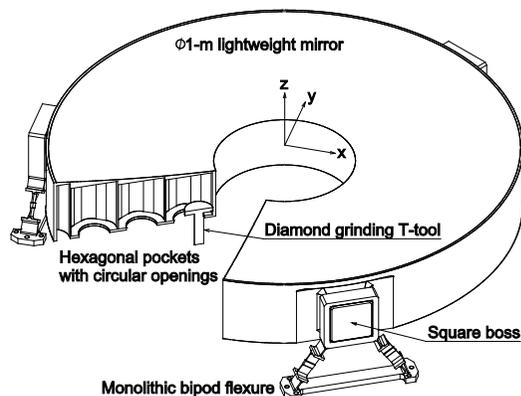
ϕ 1-m lightweight mirror having hexagonal pockets and circular openings at the back. A T-shaped diamond grinding tool enters the opening and carves into a hollow chamber to make a semi-open back. Metallic bipod flexures support the mirror at the square bosses.
